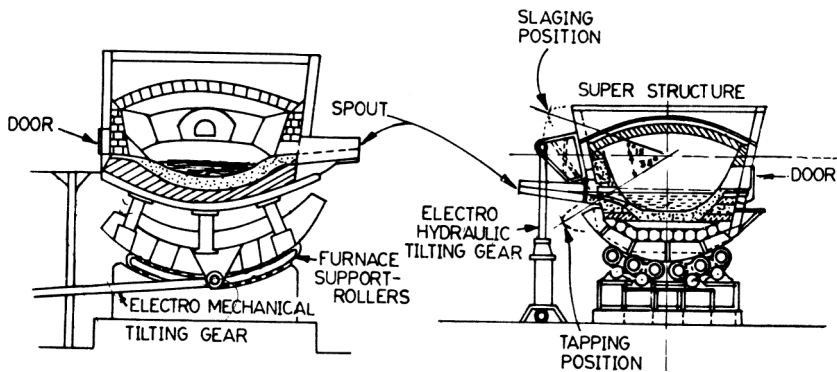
Tilting open-hearth furnace (transverse section).
